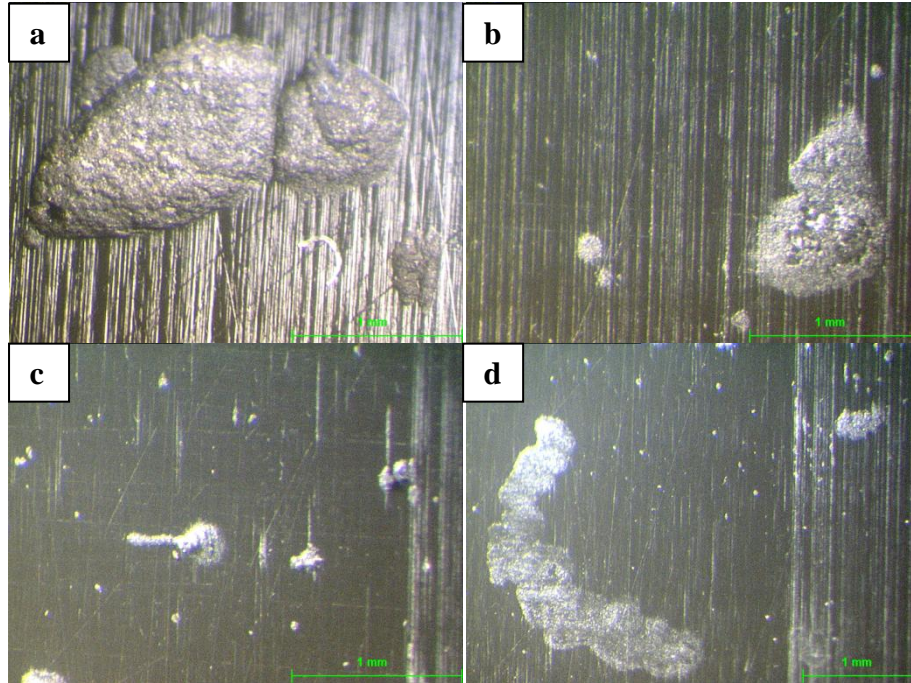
Replicas of the corrosion under the crevice former (a) and dry salt patches (b, c and d) on larger scale fatigue specimen 1
